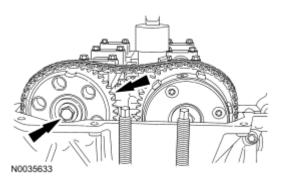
Locating Exhaust Camshaft Drive Gear Bolt
